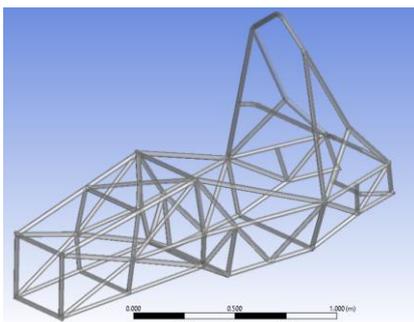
Space frame chassis – isometric view (Ansys DesignModeler)
